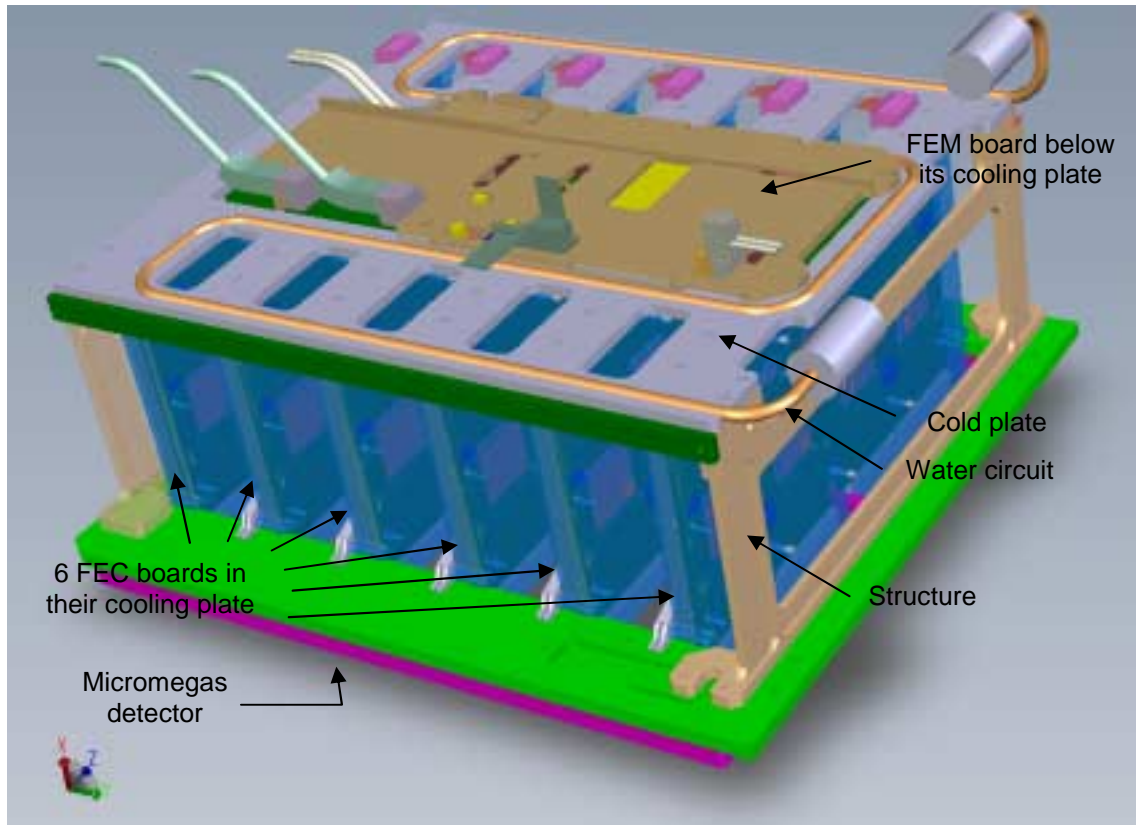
A detection module : one Micromegas detector, six FEC boards, one FEM board, their shielding and cooling plates, a mechanical structure.
